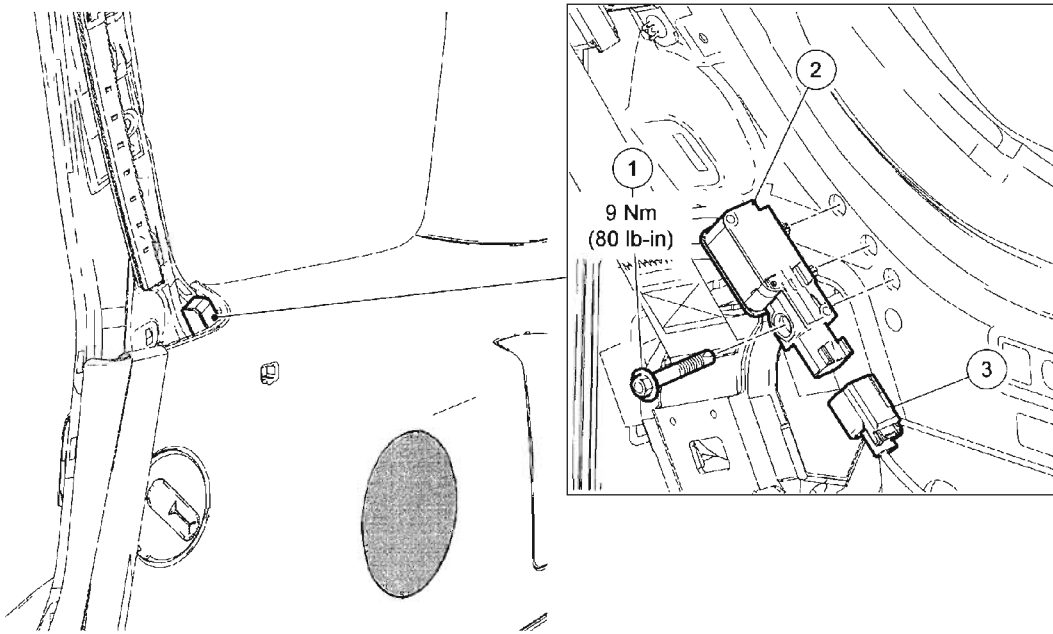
Aligning Side Impact Sensor Locator Tabs
